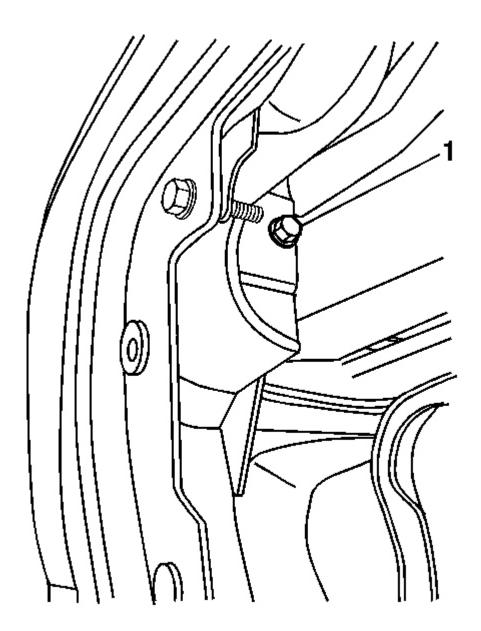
Identifying Right I/P Access Cover Courtesy of GENERAL MOTORS CORP.
